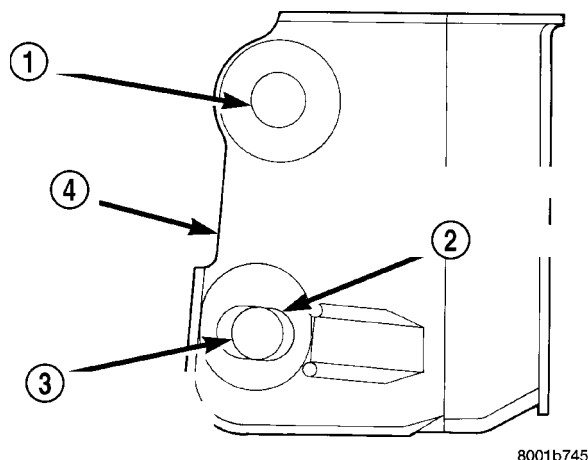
Strut Clevis Bracket Bolt Hole Grinding Area
